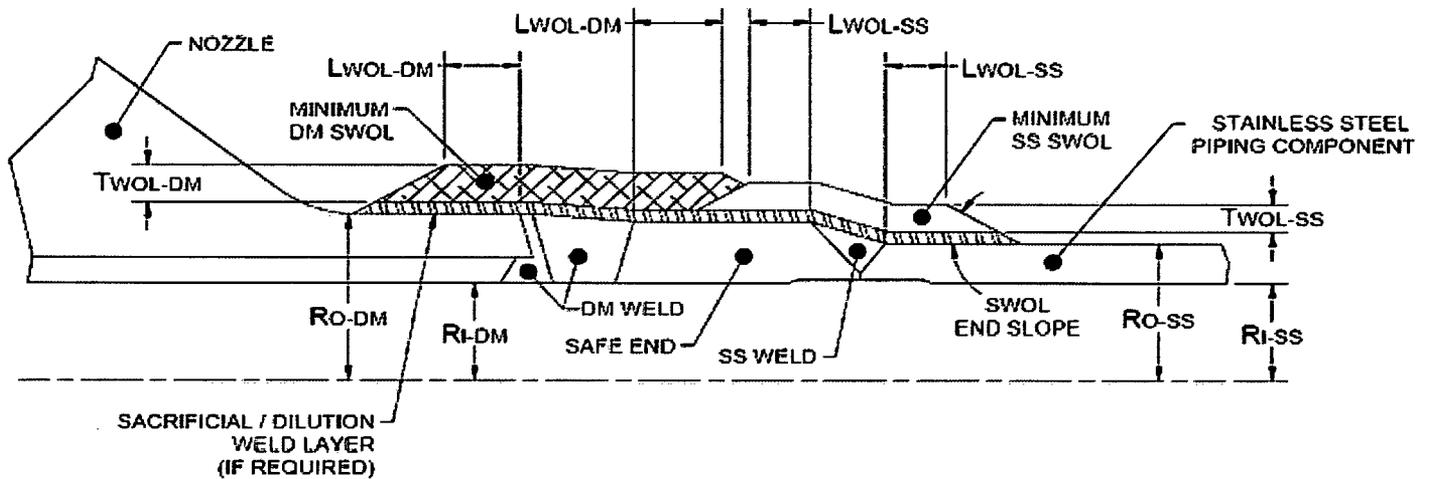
Weld Overlay Design Parameters for the Charging Inlet Nozzle
